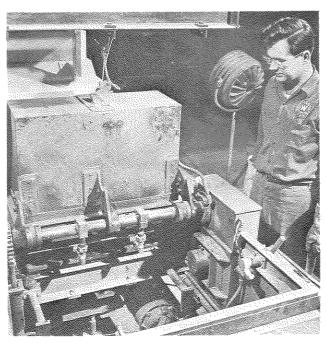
The two halves of the machine are flopped 180° so that the supply of sand-resin mix will come in contact with the heated pattern.
